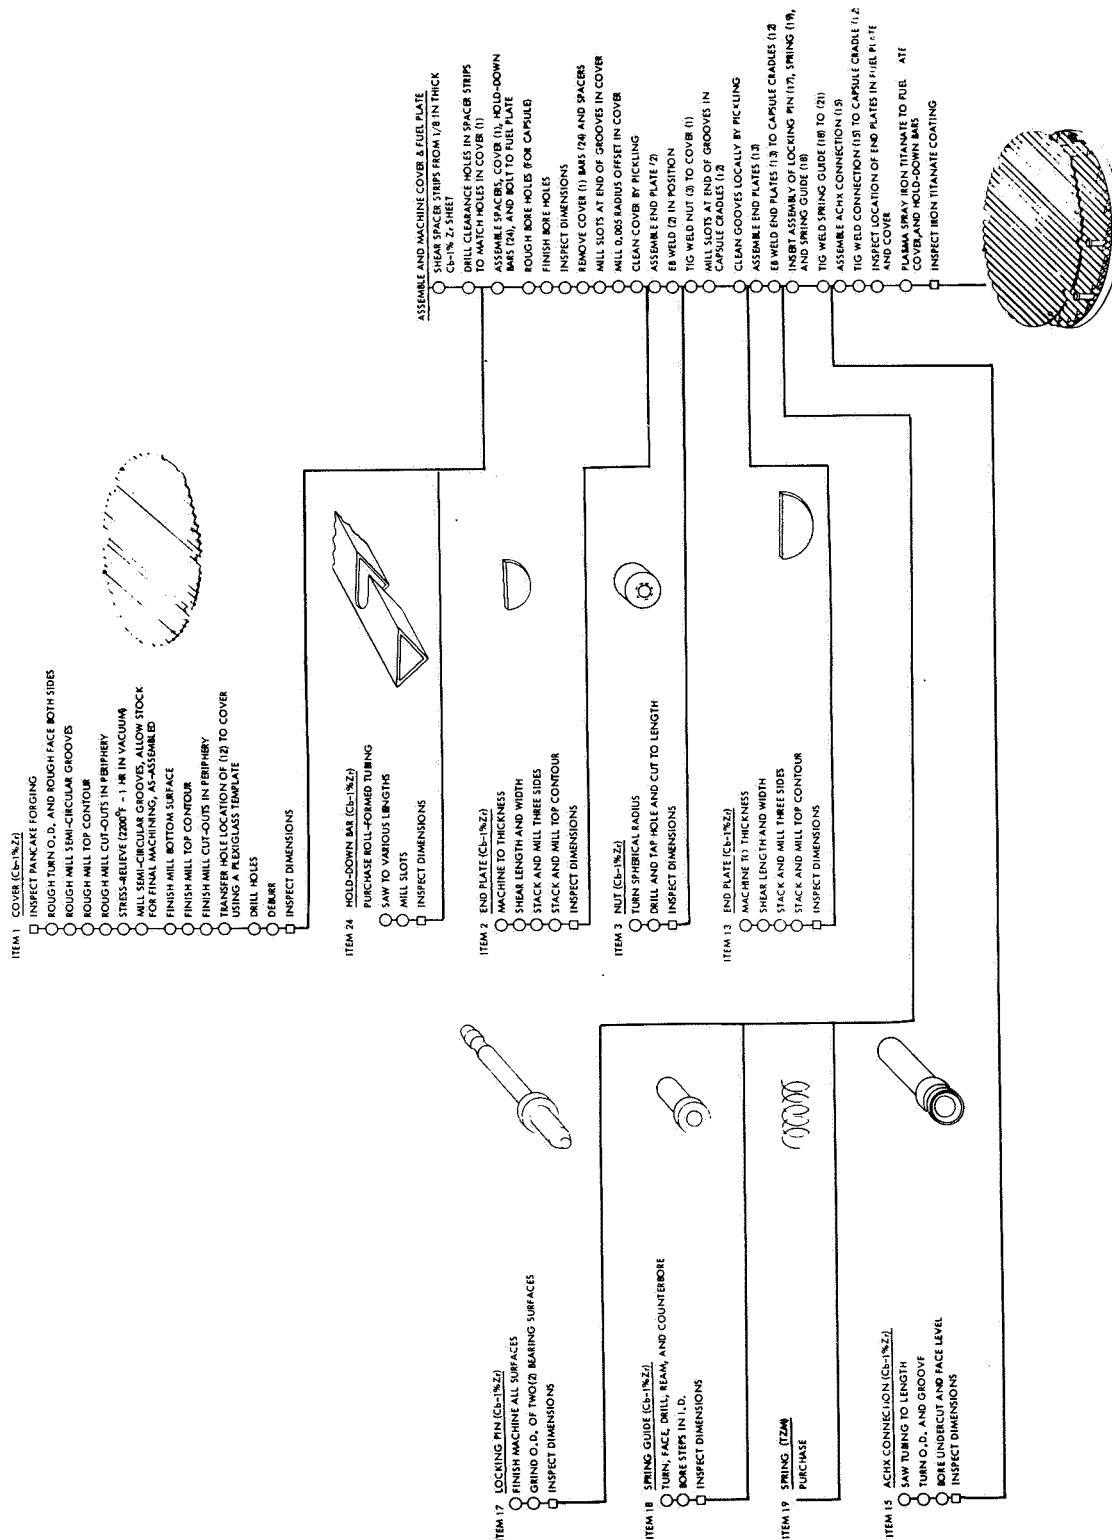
MANUFACTURING PLAN COVER AND FUEL PLATE ASSEMBLY
